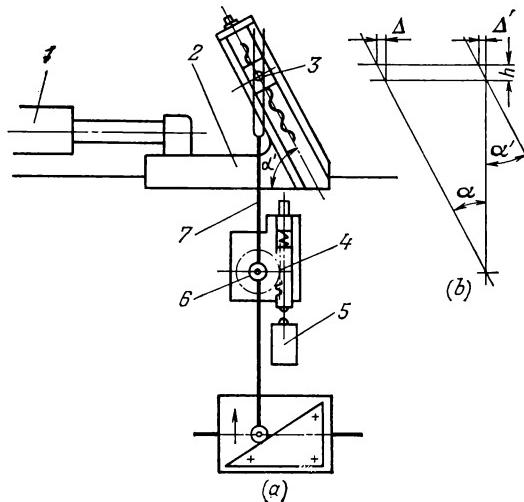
Diagram of the mechanism used in the model 1A136 automatic screw machine for feeding the bar stock:
